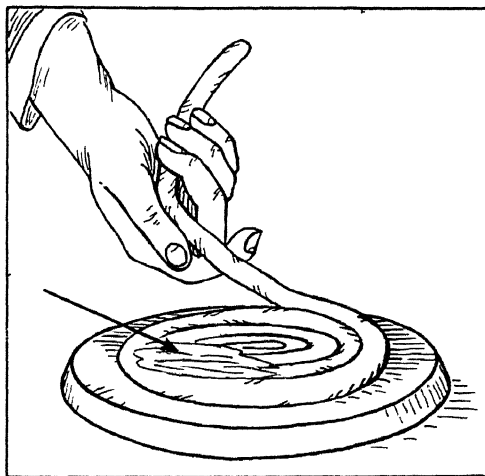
The bottom is formed by tightly rolling several good coils together on a damp plaster slab. The arrow points to a spot where the coils have been rubbed together with a horizontal stroke.
